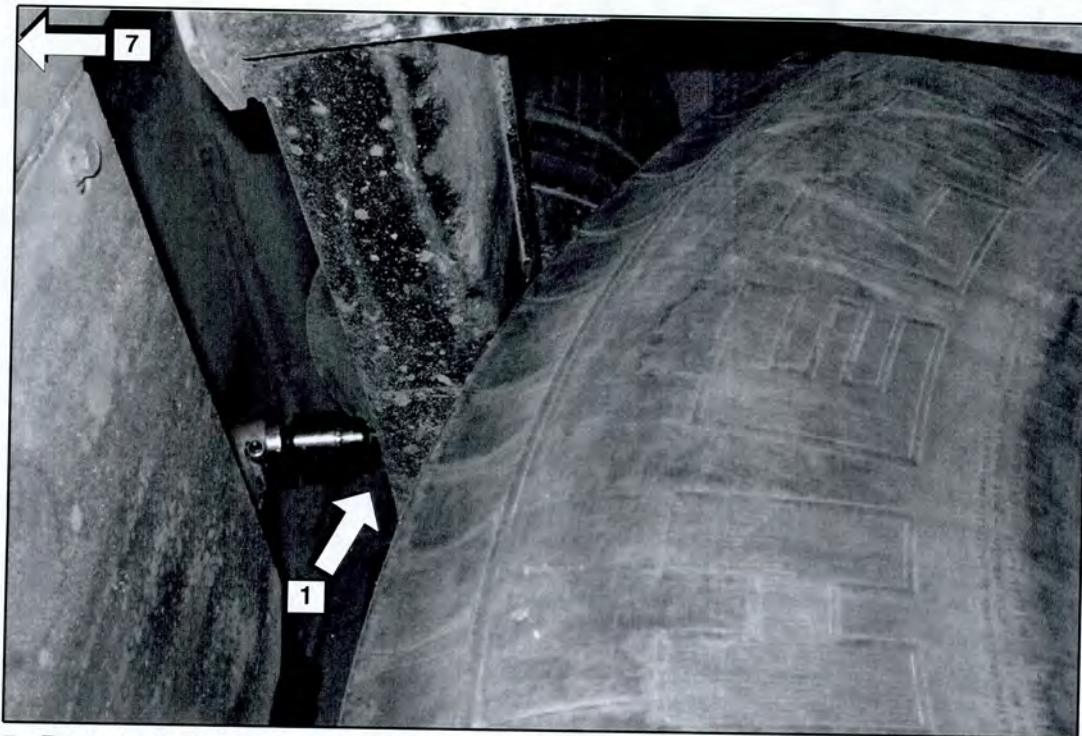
Drain hole drilled in the drive suspension support structure (curbside of coach shown).
